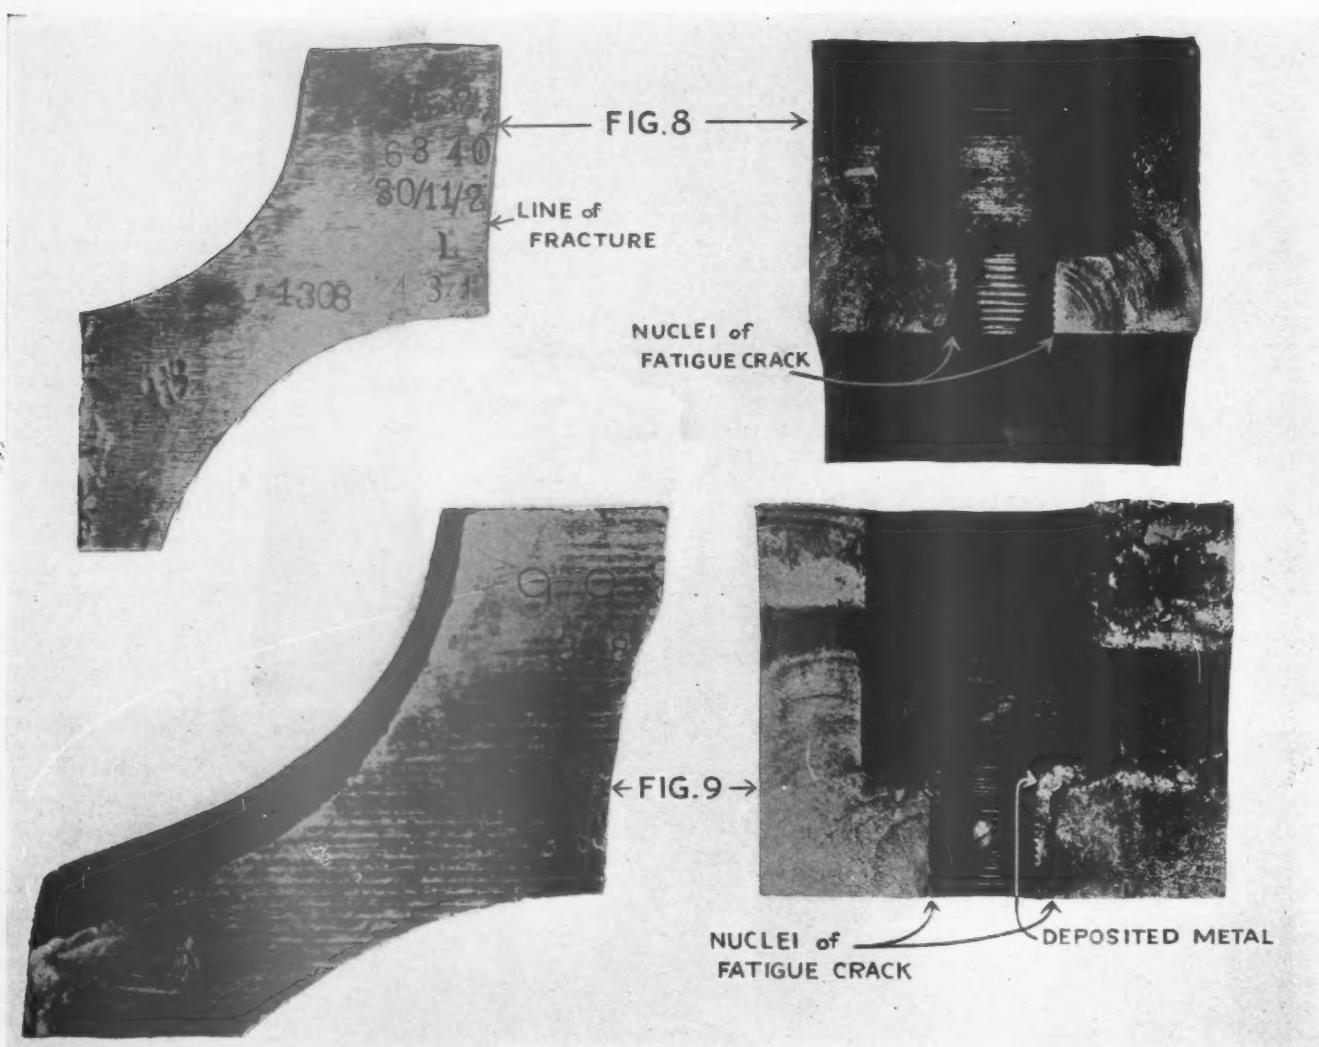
The progress of the fatigue cracks is clearly shown for this main rod, which failed in service. Fig. 9—Deposited metal to fill the grease plug hole complicated conditions in this broken side rod
